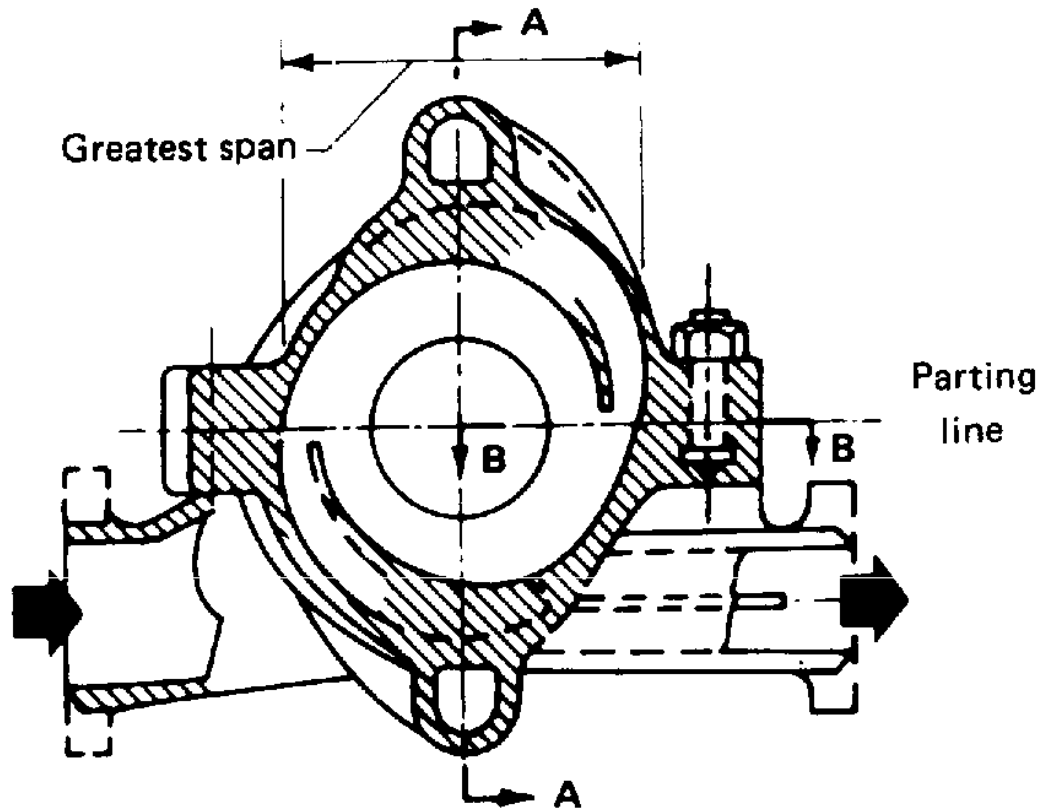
(a)-1 AXIALLY SPLIT CASING, VOLUTE PUMP, TYPE G
